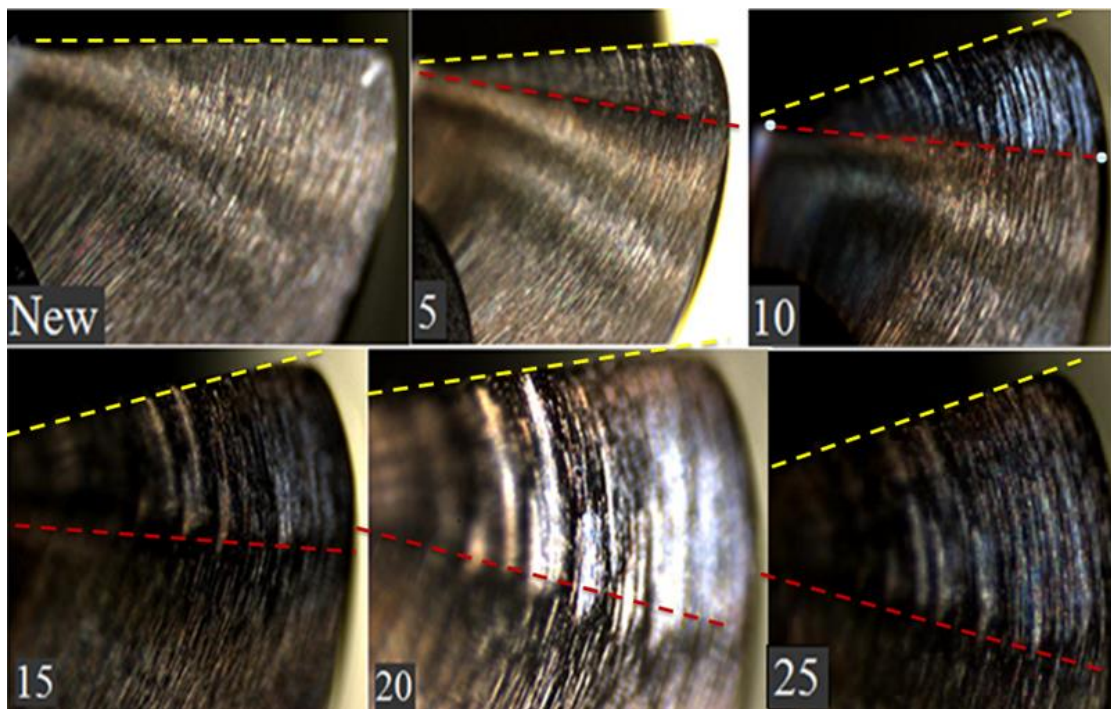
(a) Optical images of drill cutting edge as received and for every five holes drilled
